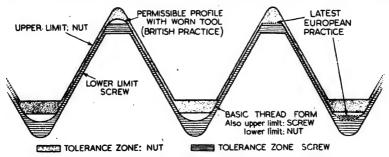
THREAD TOLERANCE ZONES-B.S. METRIC THREAD
